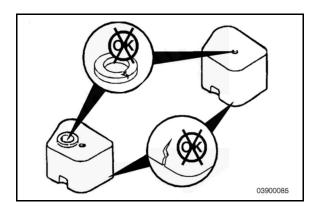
CHECK THE ROCKER LEVER COVERS FOR CRACKS
